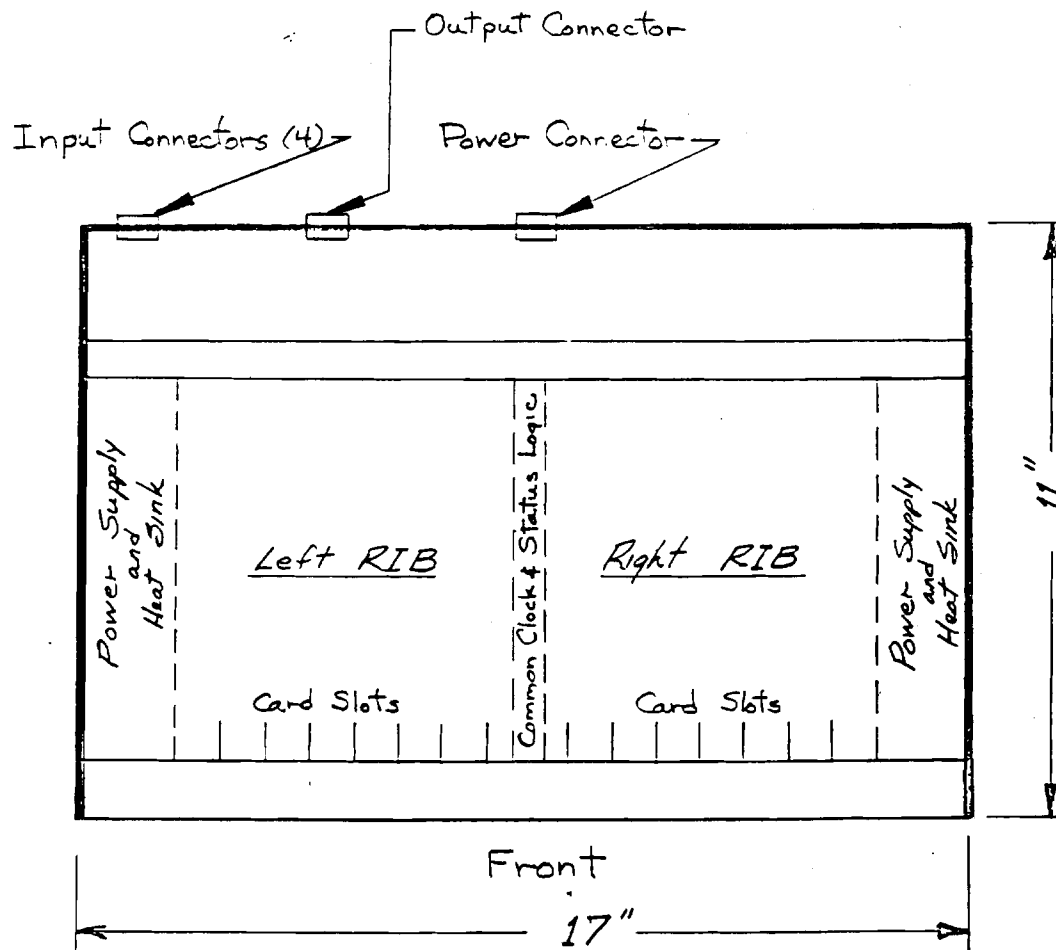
DUAL RIB CARD CAGE PHYSICAL LAYOUT (TOP VIEW)
